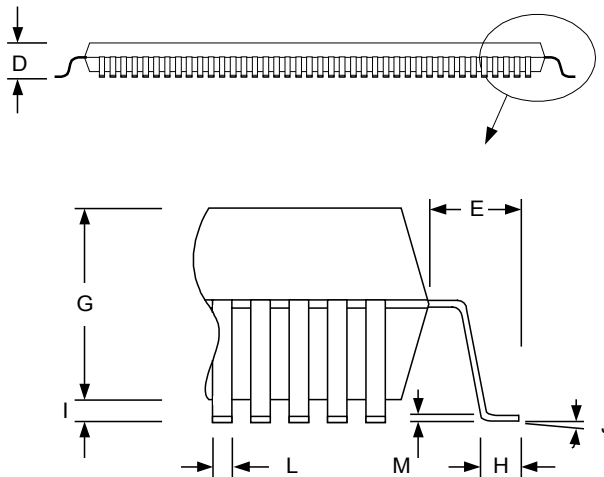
gm2121 160-pin PQFP Mechanical Drawing
